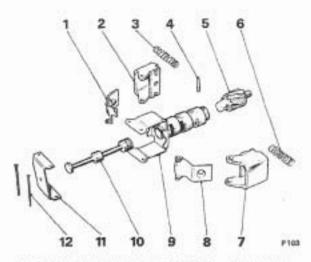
GOVERNOR ASSEMBLY - EXPLODED
